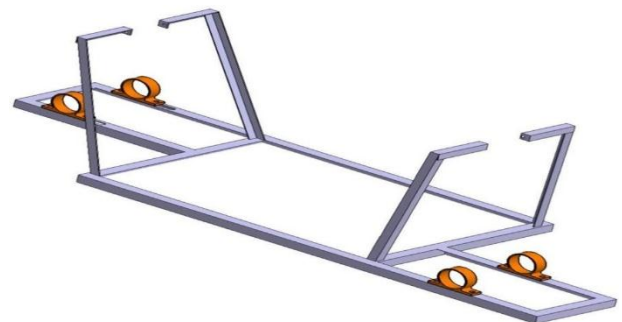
Perspective View of fixture and the location of pedestal bearing on which cylinder oscillates.
